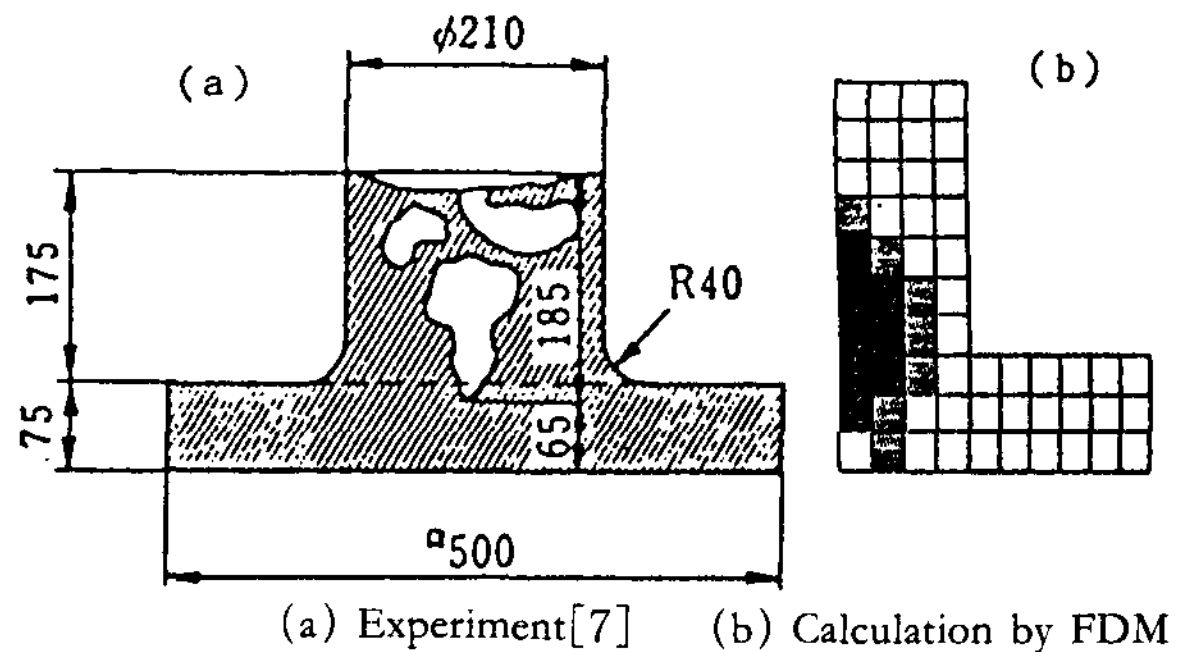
Prediction of shrinkage defects in carbon steel castings. (70)
